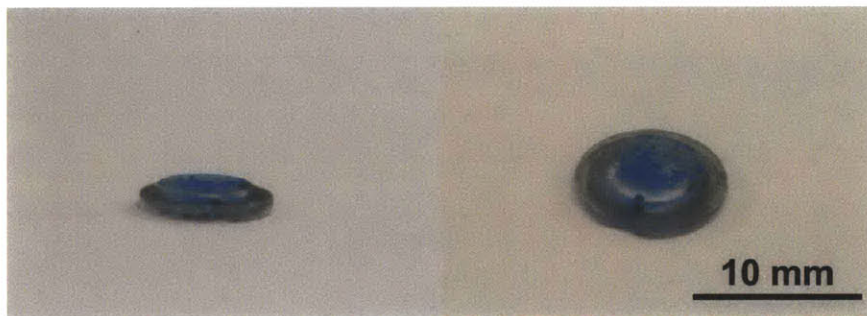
Compressed acrylic disks act as rigid o-rings to seal the composite nozzle. The observable blue color on top of the disk is the residual powder that remains on top of the disk after injection.
